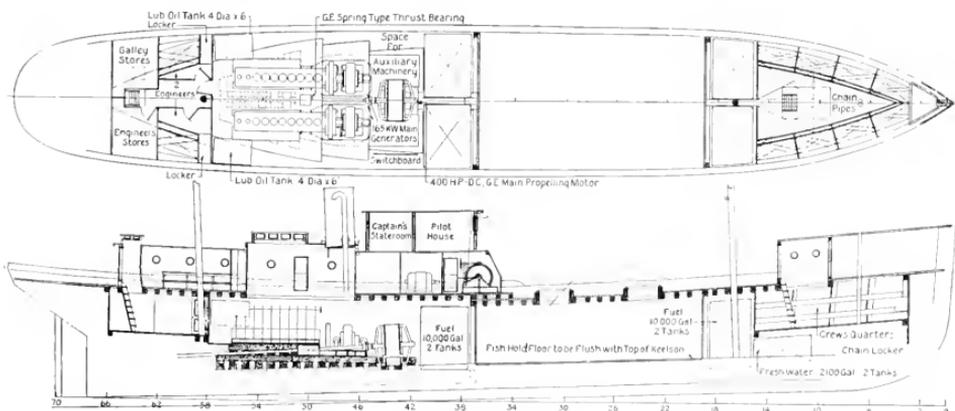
Sectional Elevation and Plan of *Mariner*, Showing Location of Propulsion Equipment
